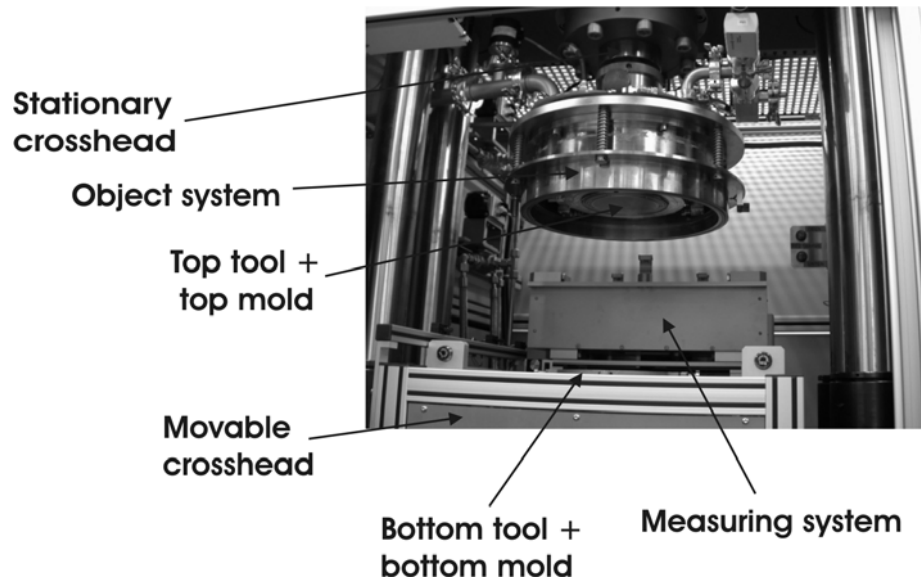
Optical view of the hot embossing system HEX 03 (Jenoptik Mikrotechnik, Jena, Germany).
